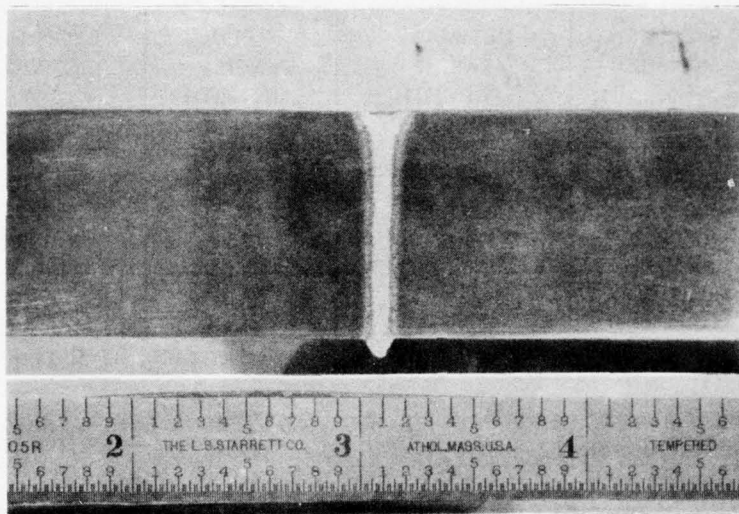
Macro-Section of 2014-T651 Aluminum Butt Weld (1.5 X MAG)
